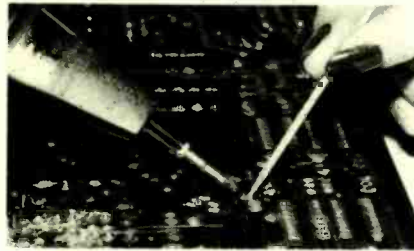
AFTER A COMPONENT IS REMOVED, solder should be removed from the hole using a toothpick.
